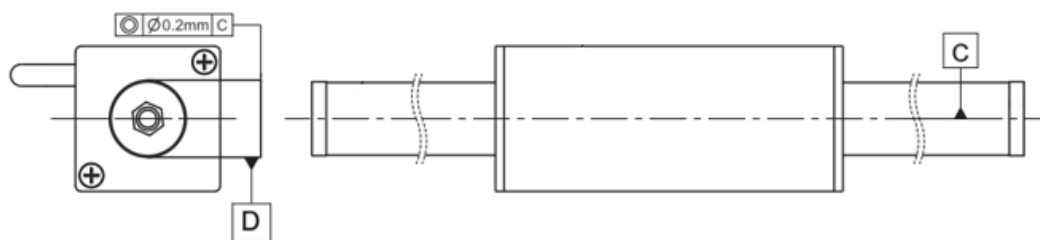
Geometric tolerance of forcer and stator assembly installation height
